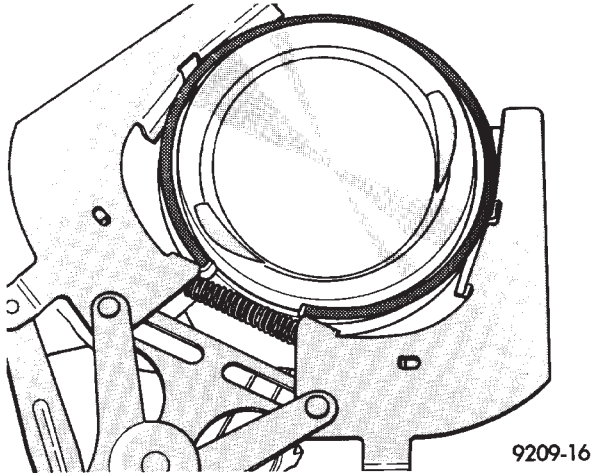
PISTON RINGS - REMOVAL/INSTALLATION
